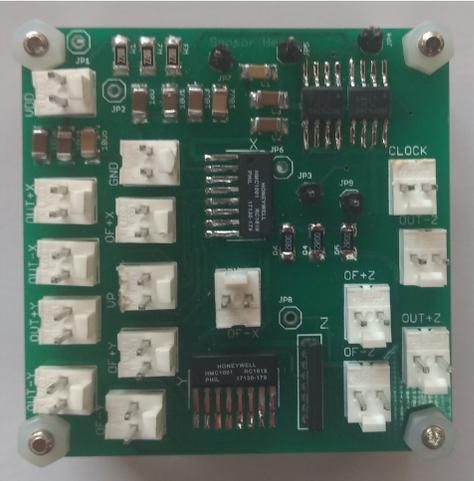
Constructed PCB for the sensor head of MAG-SPEL
